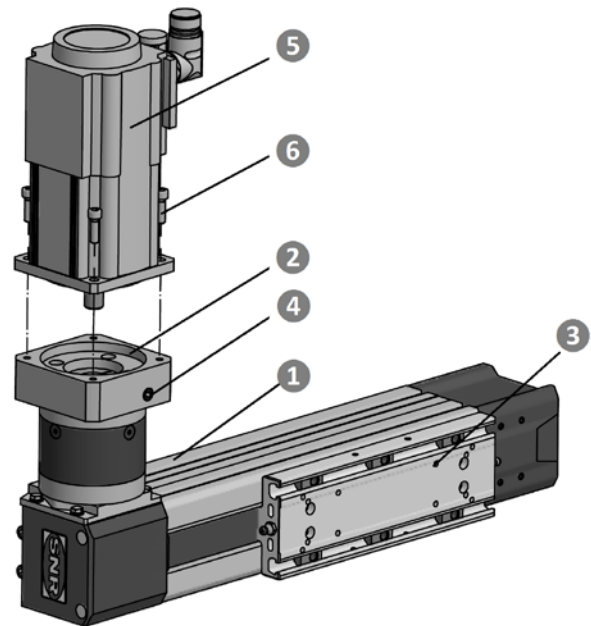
Drive assembly for Linear Axis with planetary gearbox
